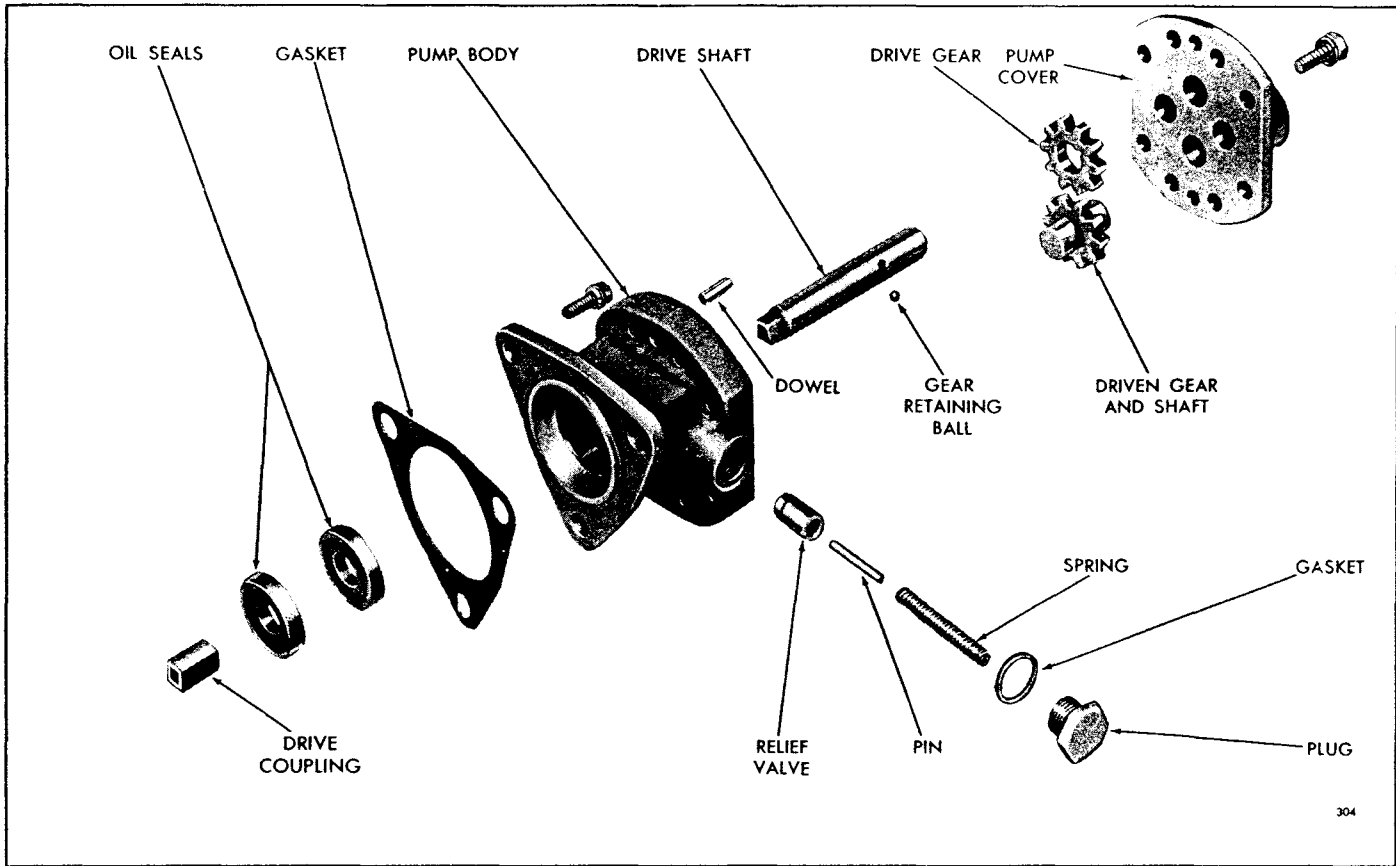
Fuel Pump Details and Relative Location of Parts (Right Hand Pump Shown)
